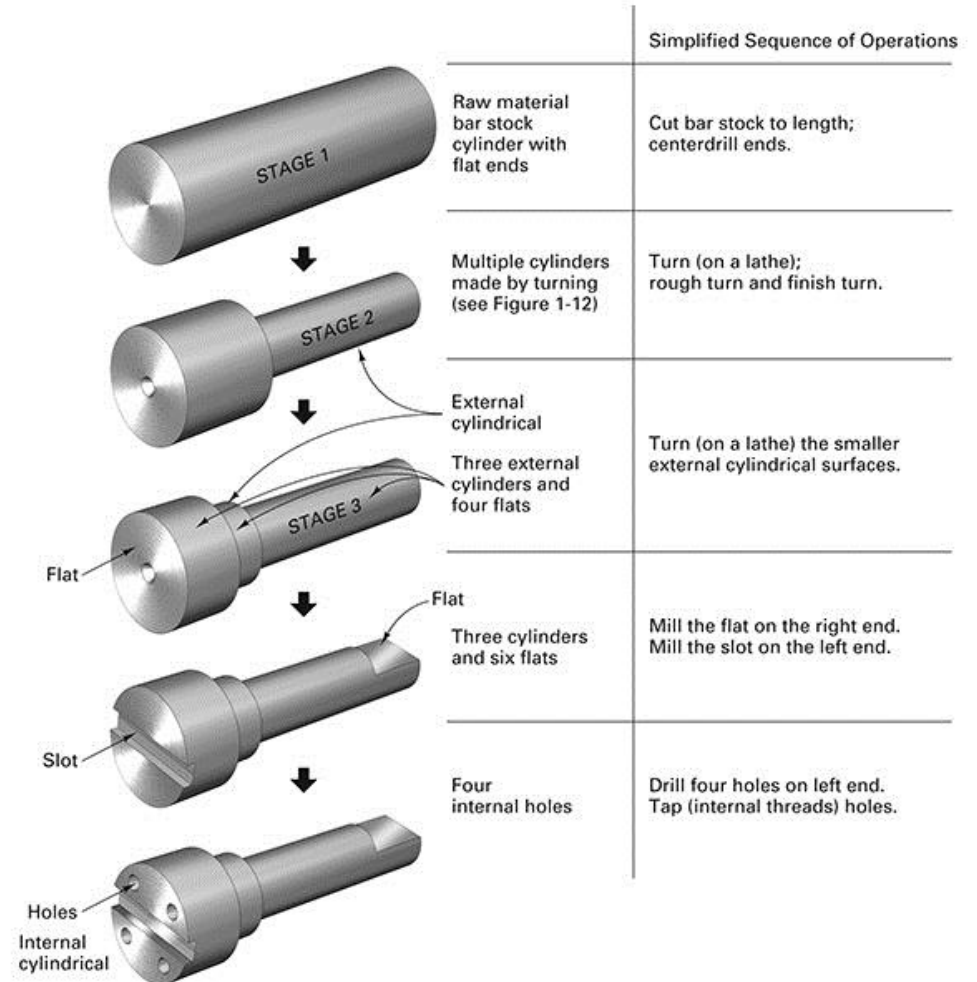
The component called a pinion shaft is manufactured by a “sequence of operations” to produce various geometric surfaces.
